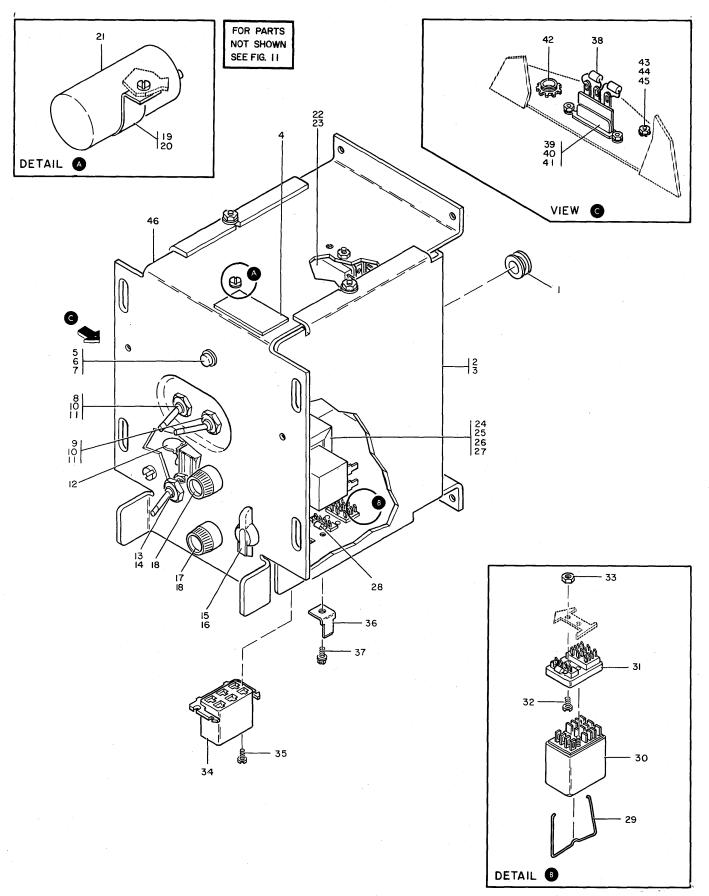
PRIMARY POWER BOX ASSEMBLY.
